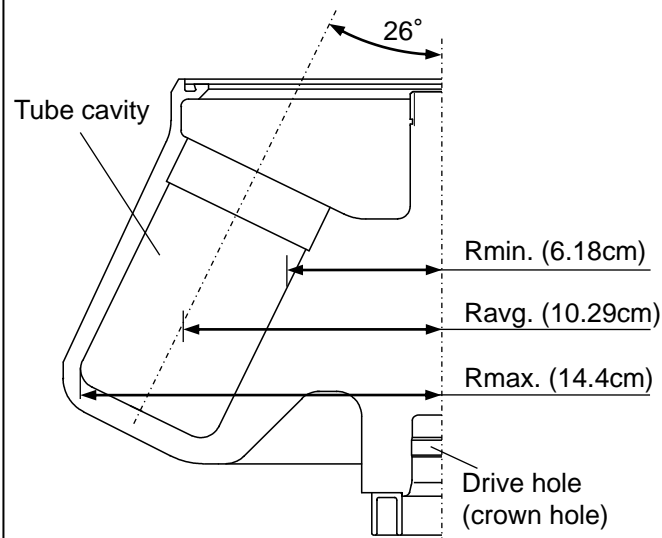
Cross-Sectional View of the P21A2 Rotor
